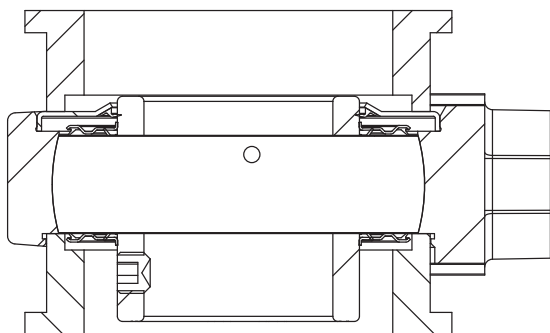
Tool, insert, housing and Backside Seal orientation. Backside Seal installed.
